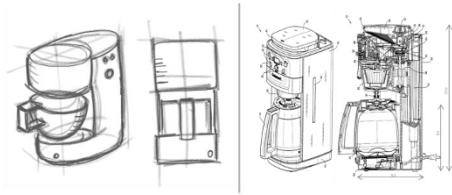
Coffee Machine sketch Vs Coffee Machine technical drawing.
